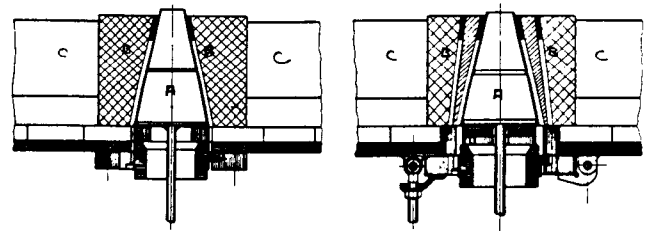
Typical mounting devices for permeable plugs (A) inside seating blocks (B) in ladle bottom (C).
